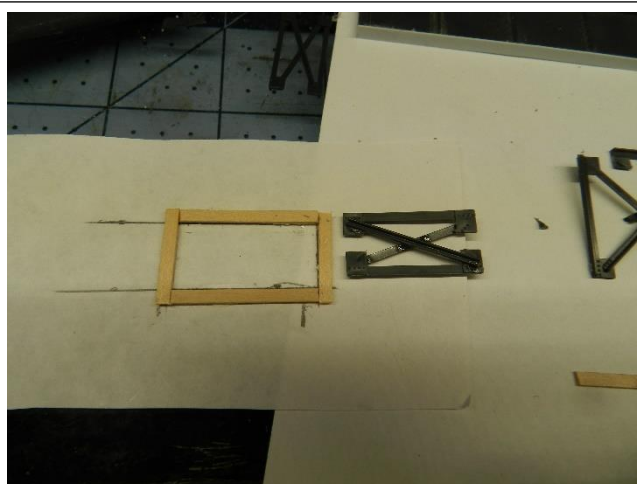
the box jig to ensure consistent reconstruction dimensions.
